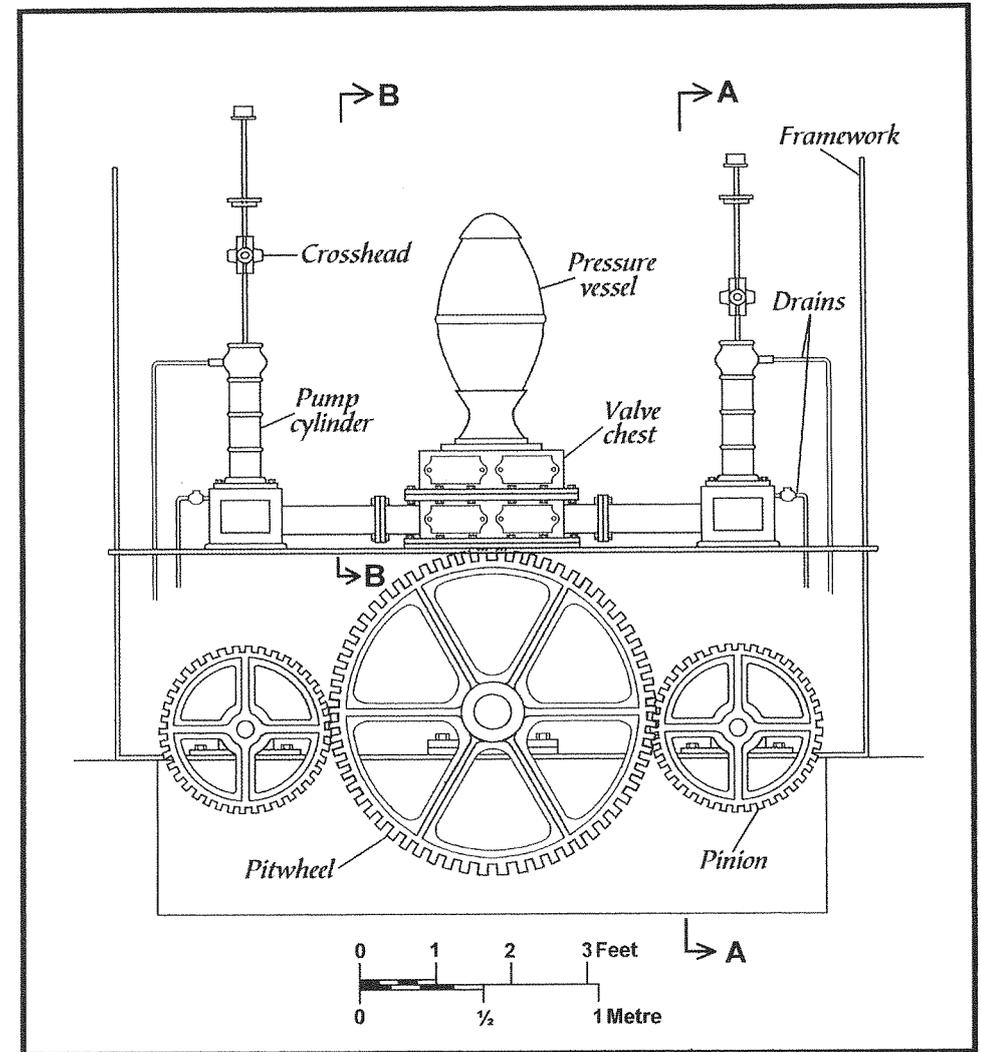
A view of the pump machinery with the crankshafts and crank arms removed to allow the pitwheel and drive pinions to be seen
